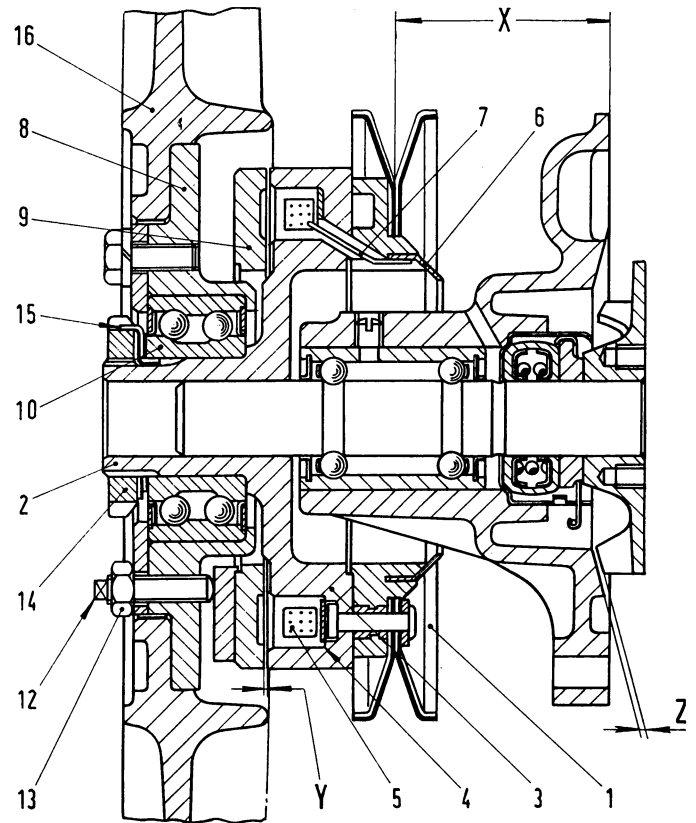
Sectional view of water pump and automatic in-and-out fan assembly (engine 118 C.000).
